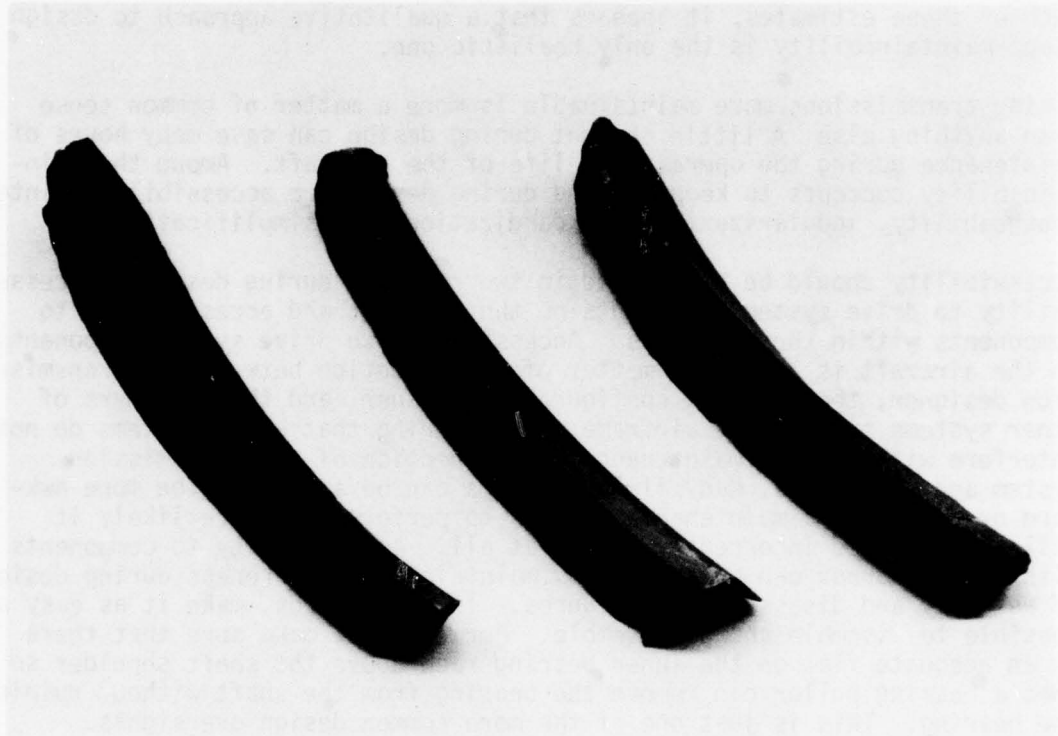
Inspection Molds for Spiral Bevel Gears.
